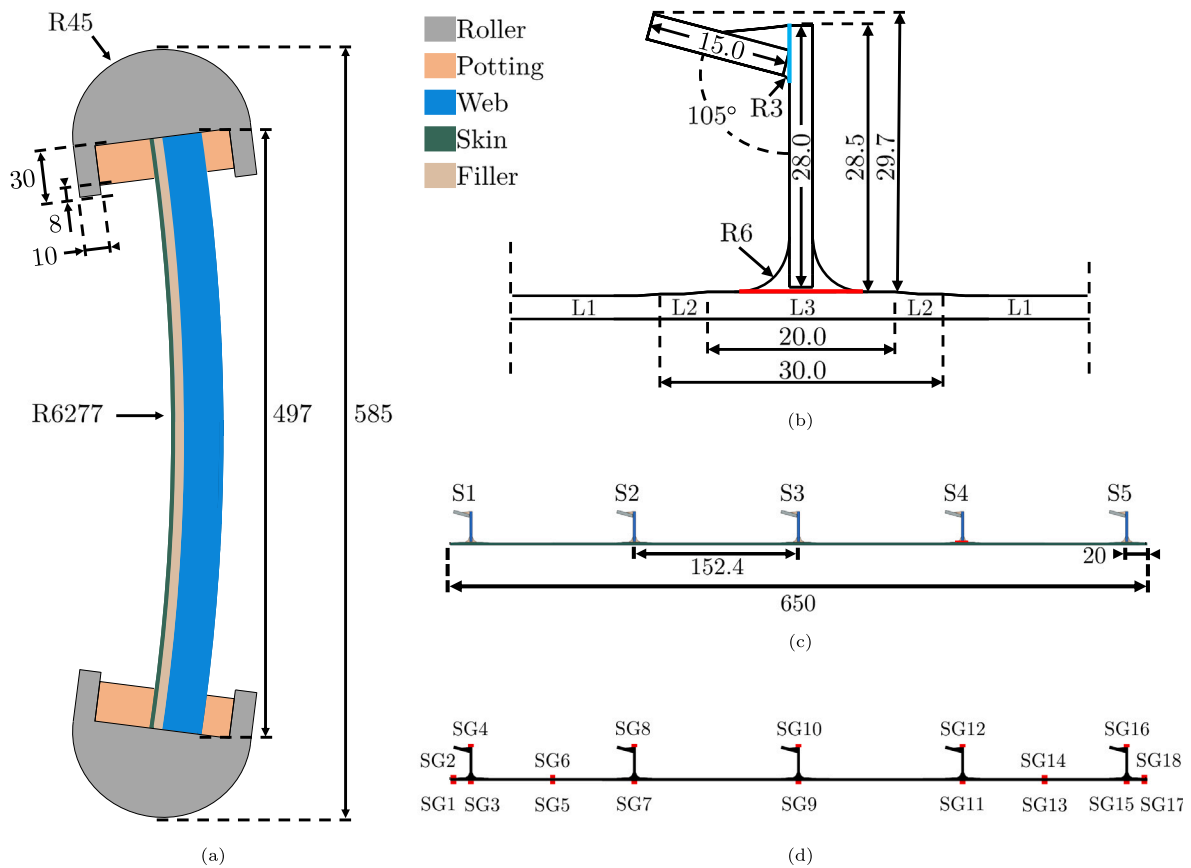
Panel geometry: (a) side-view illustration ; (b) stringer cross-section; (c) panel cross-section; (d) strain gauge positions.
